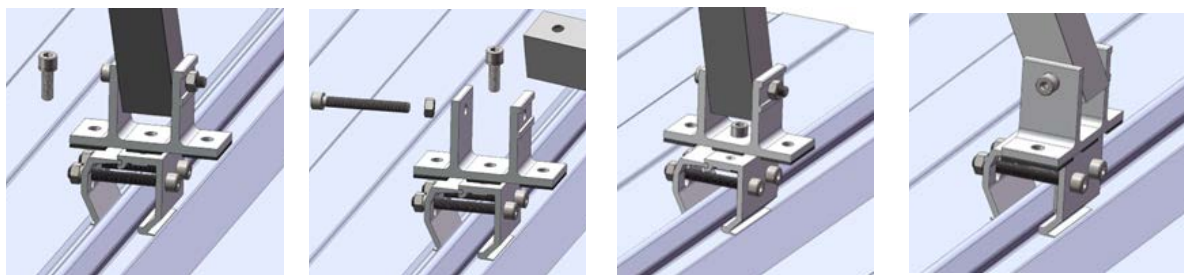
Preassembly Rear Leg Installation with Universal Klip-lok Interface
